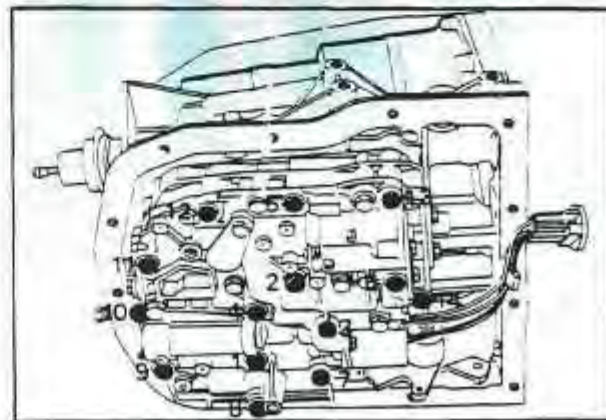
VALVE BODY ATTACHING BOLTS-SEQUENCE
